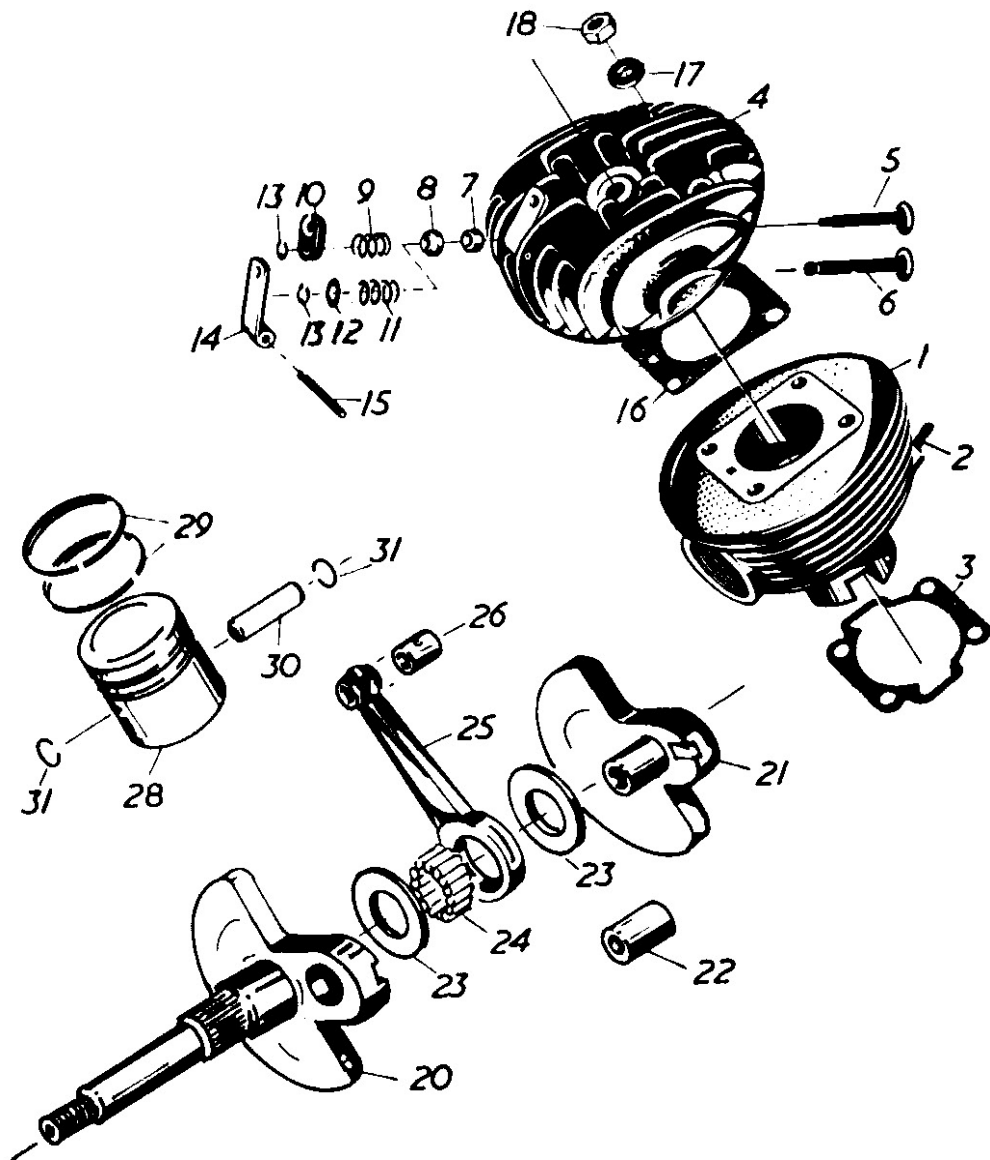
COMPONENT PARTS OF THE QUICKLY ENGINE
